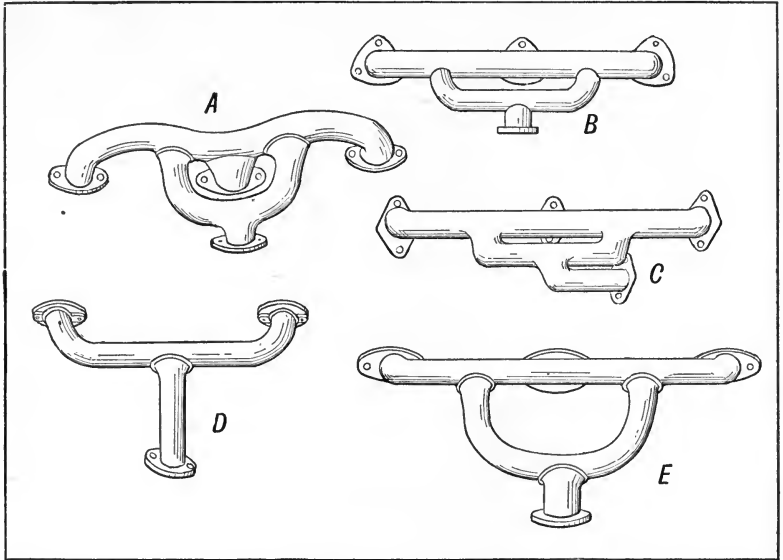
Conventional Inlet Manifolds Adapted for Six-Cylinder Motors.
